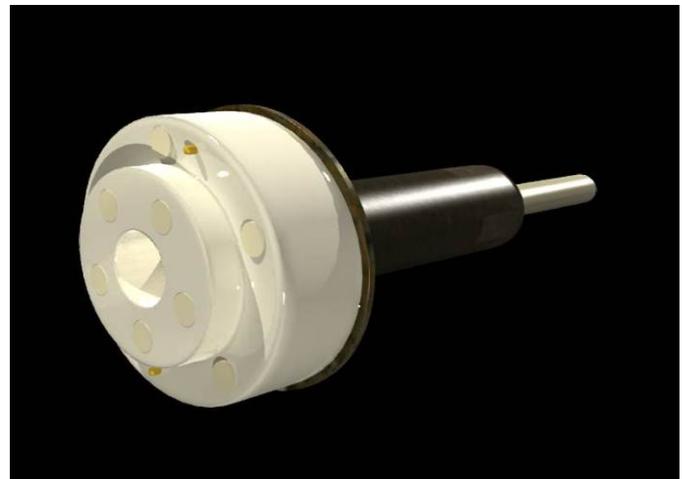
The small circles are the location of supermagnets placed around the larger plastic cylinder to hold the ring gear in place.
